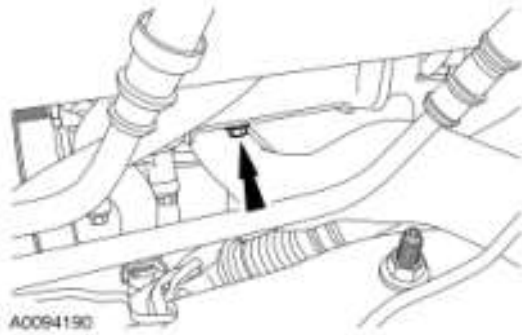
Locating A/C Manifold And Tube Assembly Support Bracket
